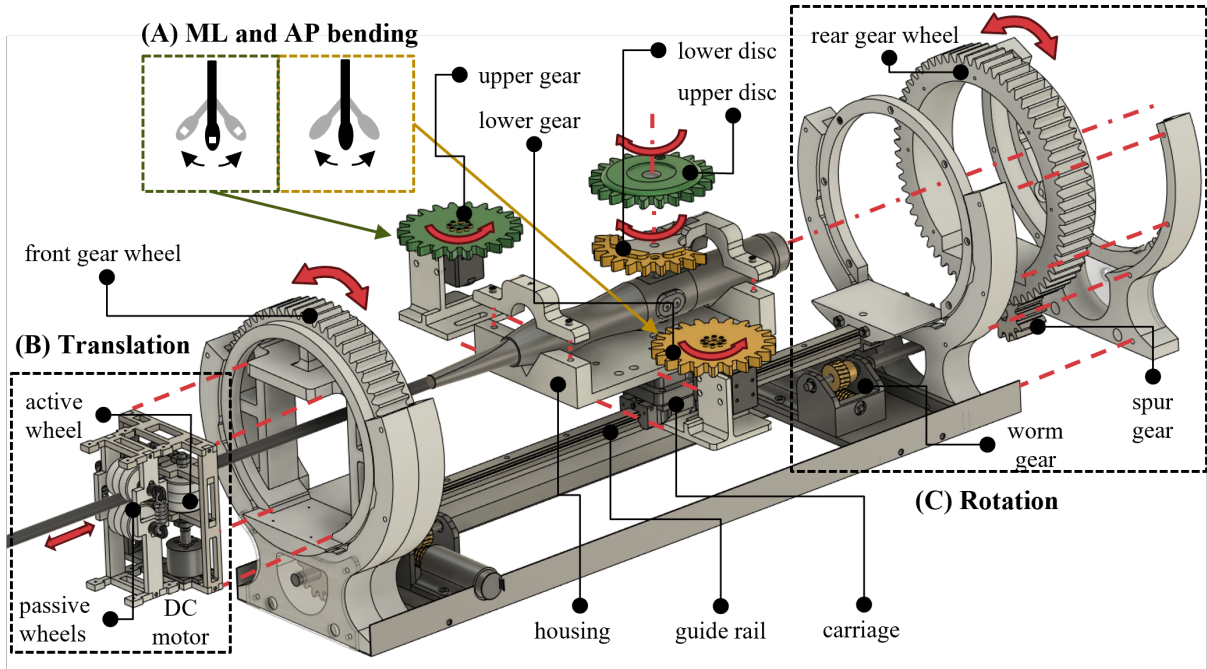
Schematic of mechanical assembly of the robotic TEE system: (A) Spur gear mechanisms for bending; (B) Translation module shows the spring-loaded conveyor roller with four wheels; (C) Rotation modules consist of a pair of worm gear and spur gear.
